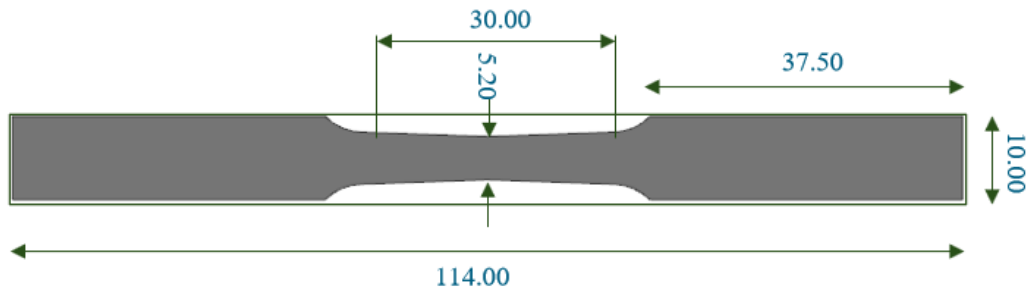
ASTM-E8 subsize specimen (dimensions in mm)
